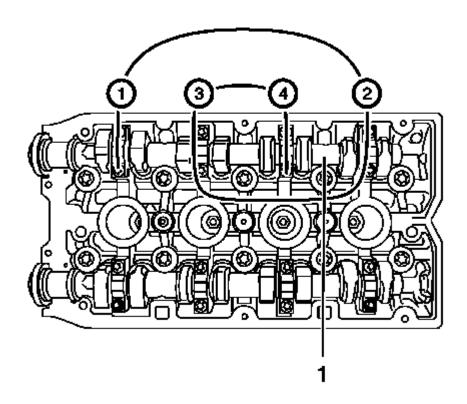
Exhaust Camshaft Bearing Cap Bolts Loosening Sequence Courtesy of GENERAL MOTORS COMPANY
